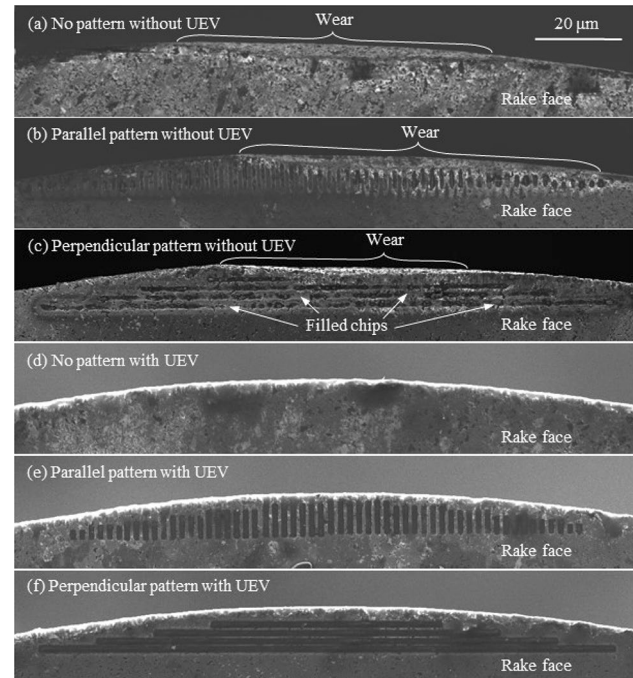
SEM images of tool wear on rake face after machining of STAVAX for 5 m: a no pattern without UEV, b parallel pattern without UEV, c perpendicular pattern without UEV, d no pattern with UEV, e parallel pattern with UEV, and f perpendicular pattern with UEV
